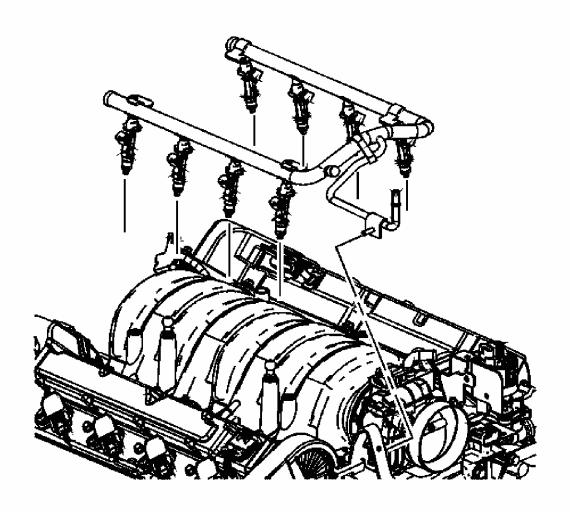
Identifying Fuel Injectors & Fuel Rail Courtesy of GENERAL MOTORS CORP.
